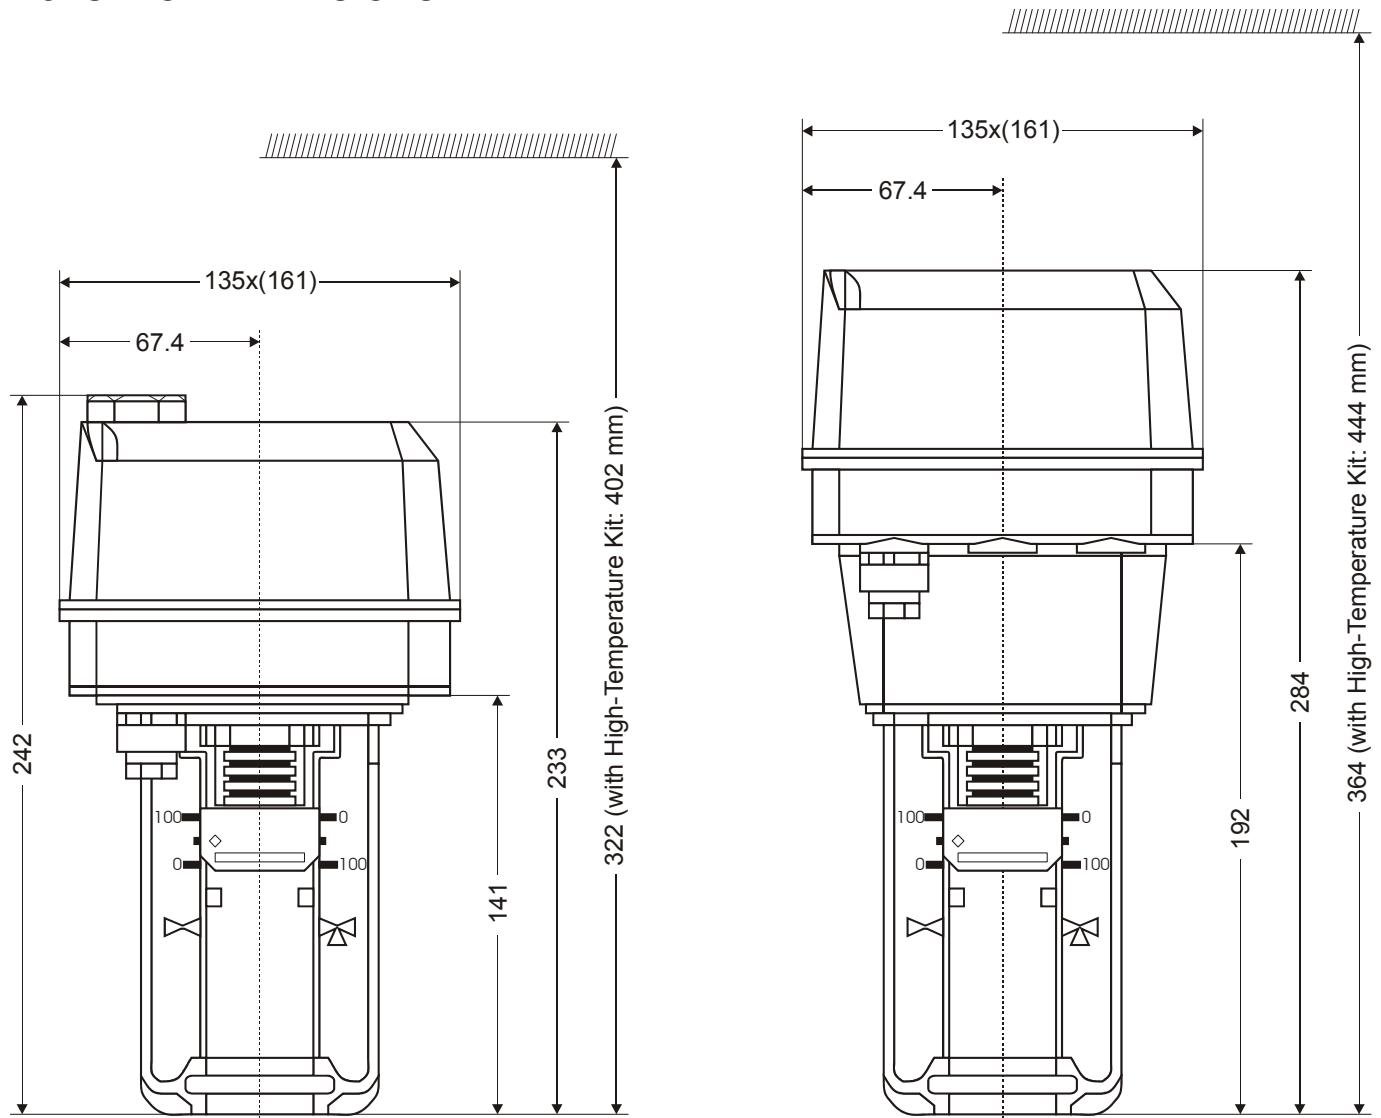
CLA20-xxxNSR6 (left) and CLLA20-xxxSD6 / CLLA20-xxxSU6 (right), dimensions (in mm)
